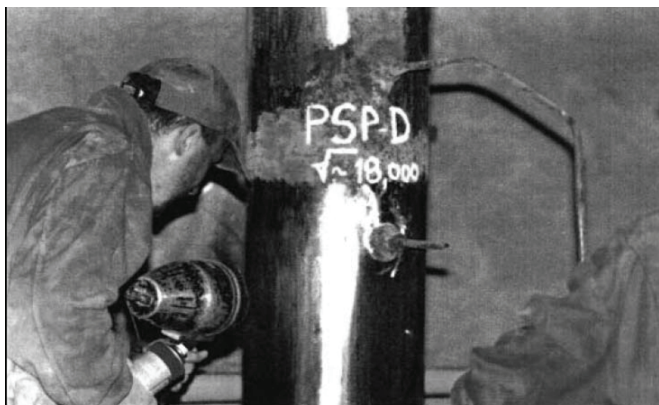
Visual inspection of pipes in the vicinity of weldment Z9
